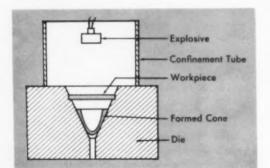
(Above) – Modified Explosive Forming Setup. The workpiece has been recessed in the die cavity rather than being placed over the die as is the conventional procedure
